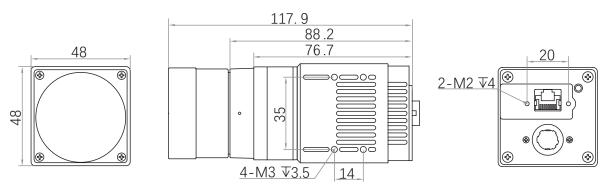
Mechanical Dimensions (in mm) of the GigE Cameras housing (The installation uses M2 and M3 screws).
